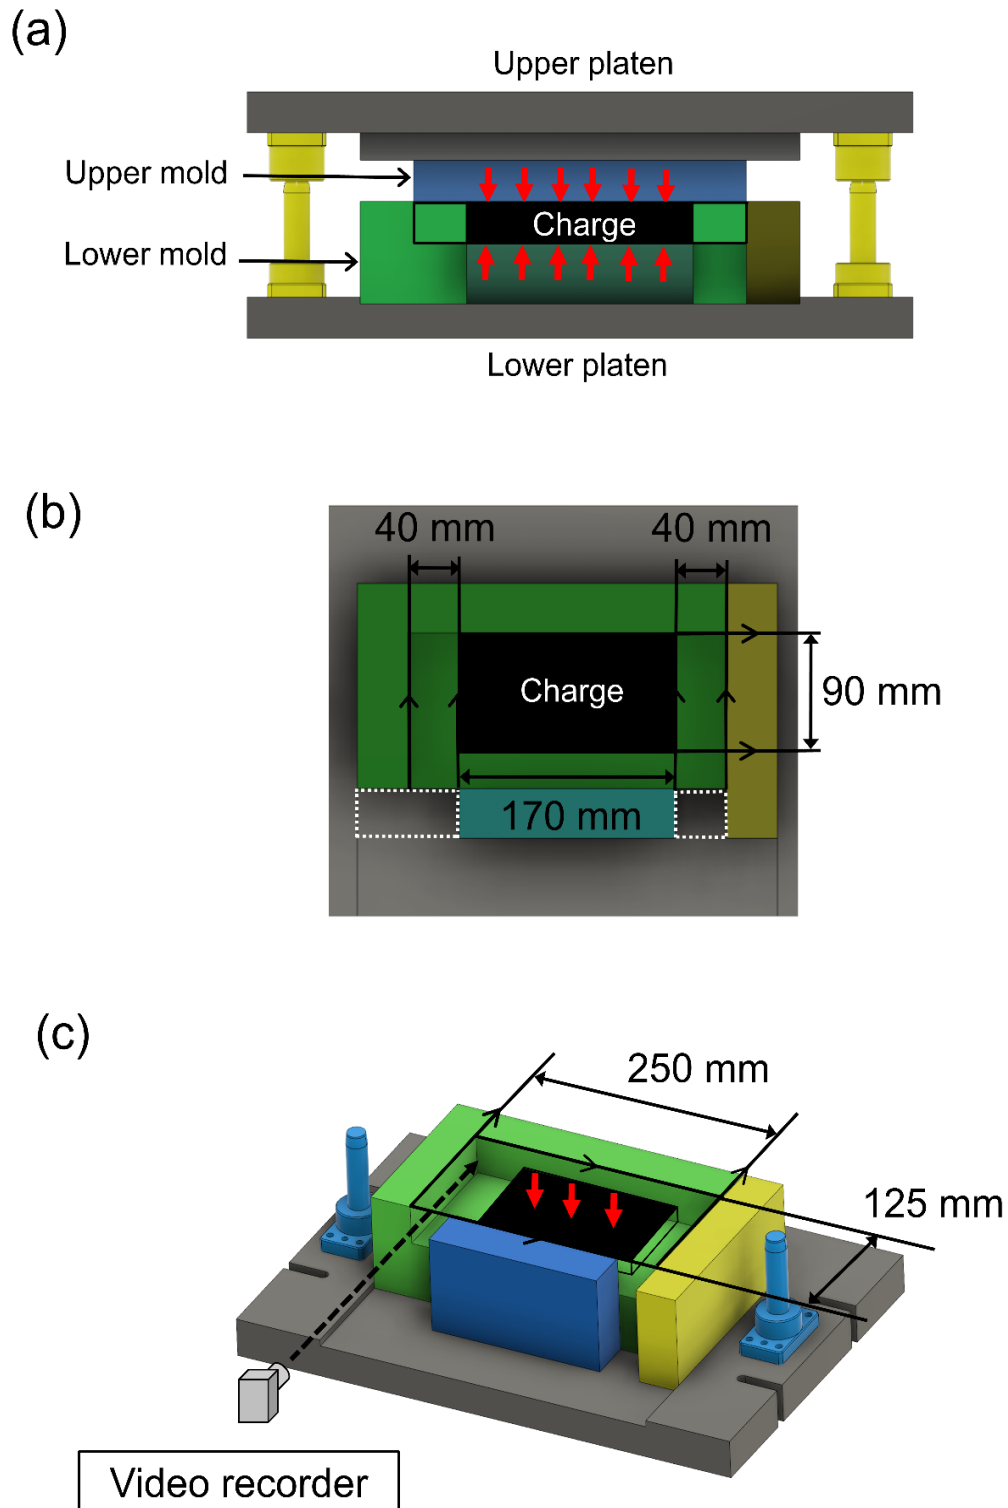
4. Mold configuration and preform dimensions for squeeze flow tests using an open mold: (a) sectional view, (b) top view and (c) 3-dimensional view.
